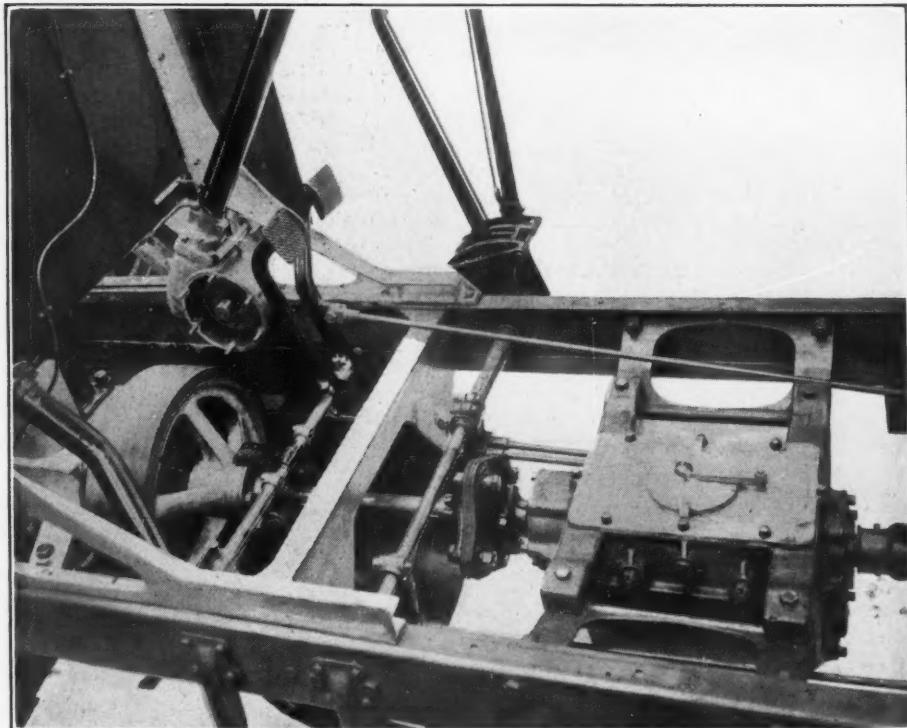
From Clutch to Gear Box of the Three-Speed Wells Chassis
